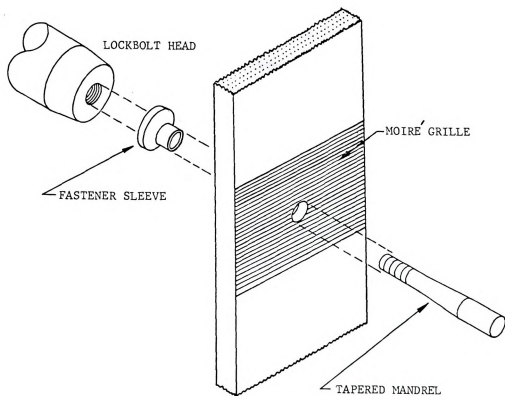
Schematic of the King coldworking process and moiré printing.
